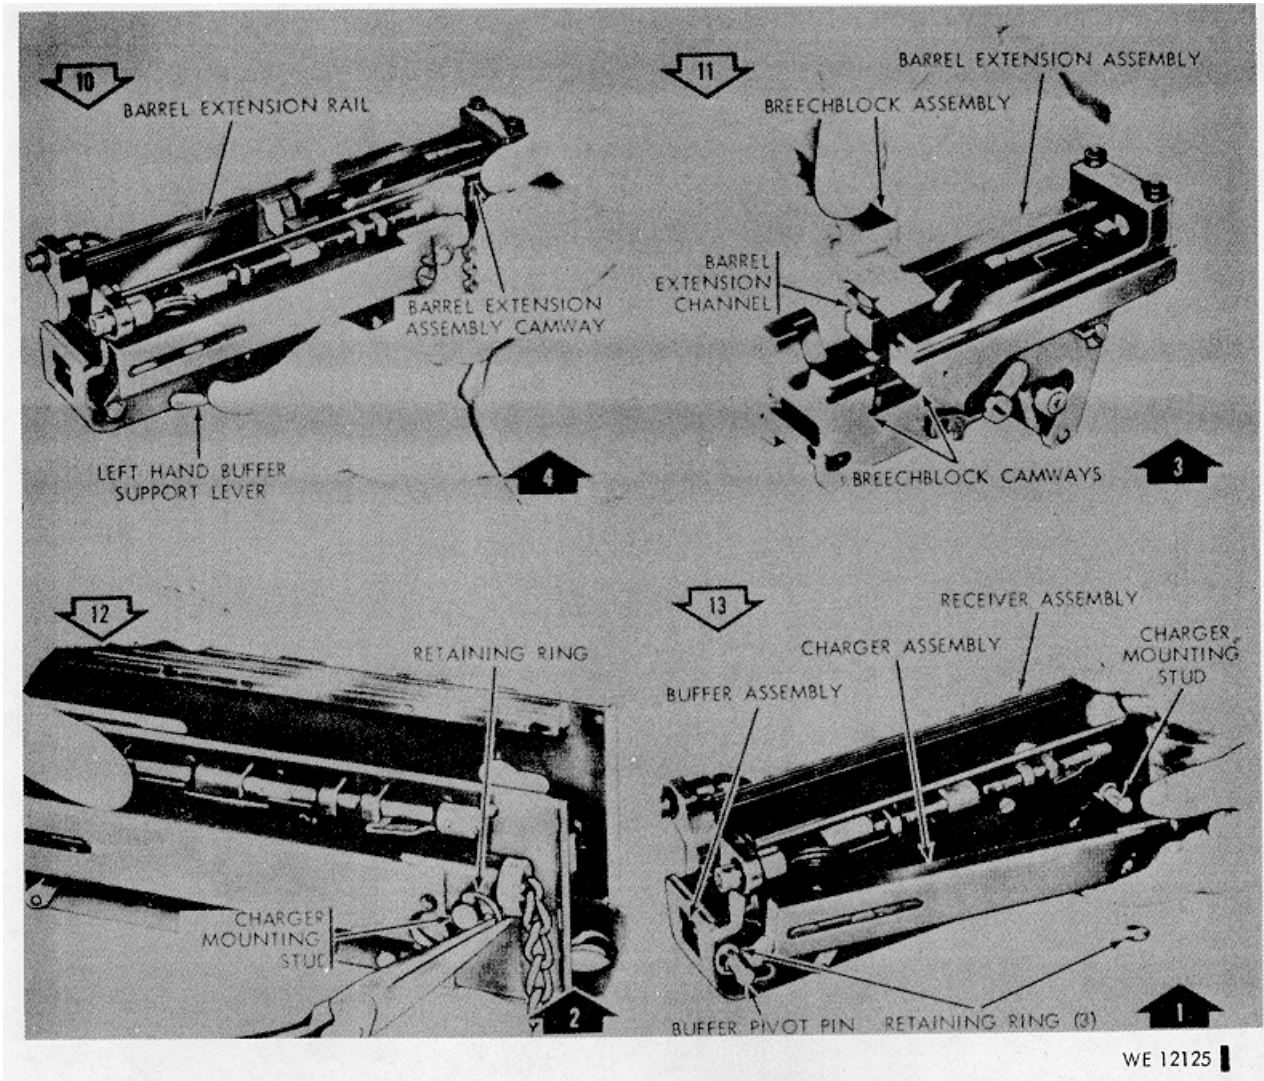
Disassembly/assembly - 7.62 mm machine gun (4 of 4)
